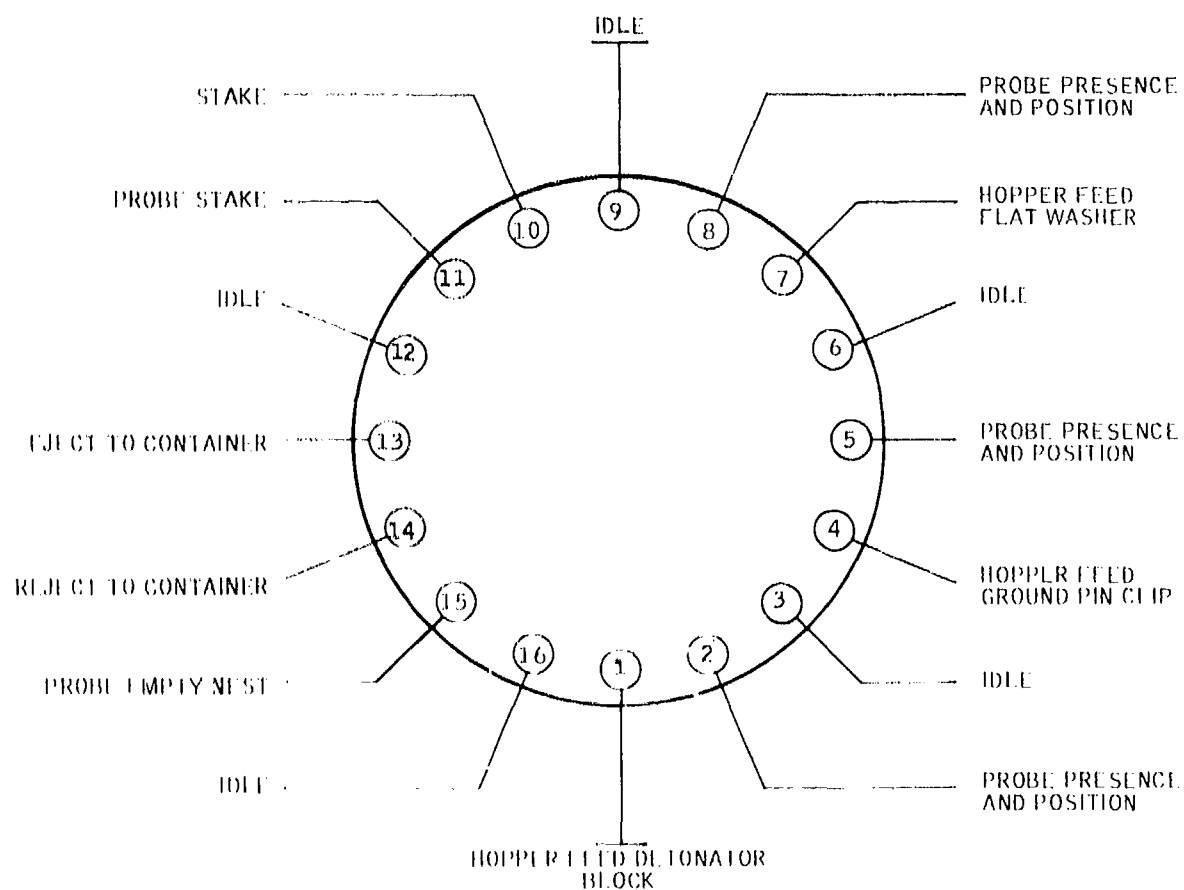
Dial schematic, machine F1 - detonator block assembly operation 1
